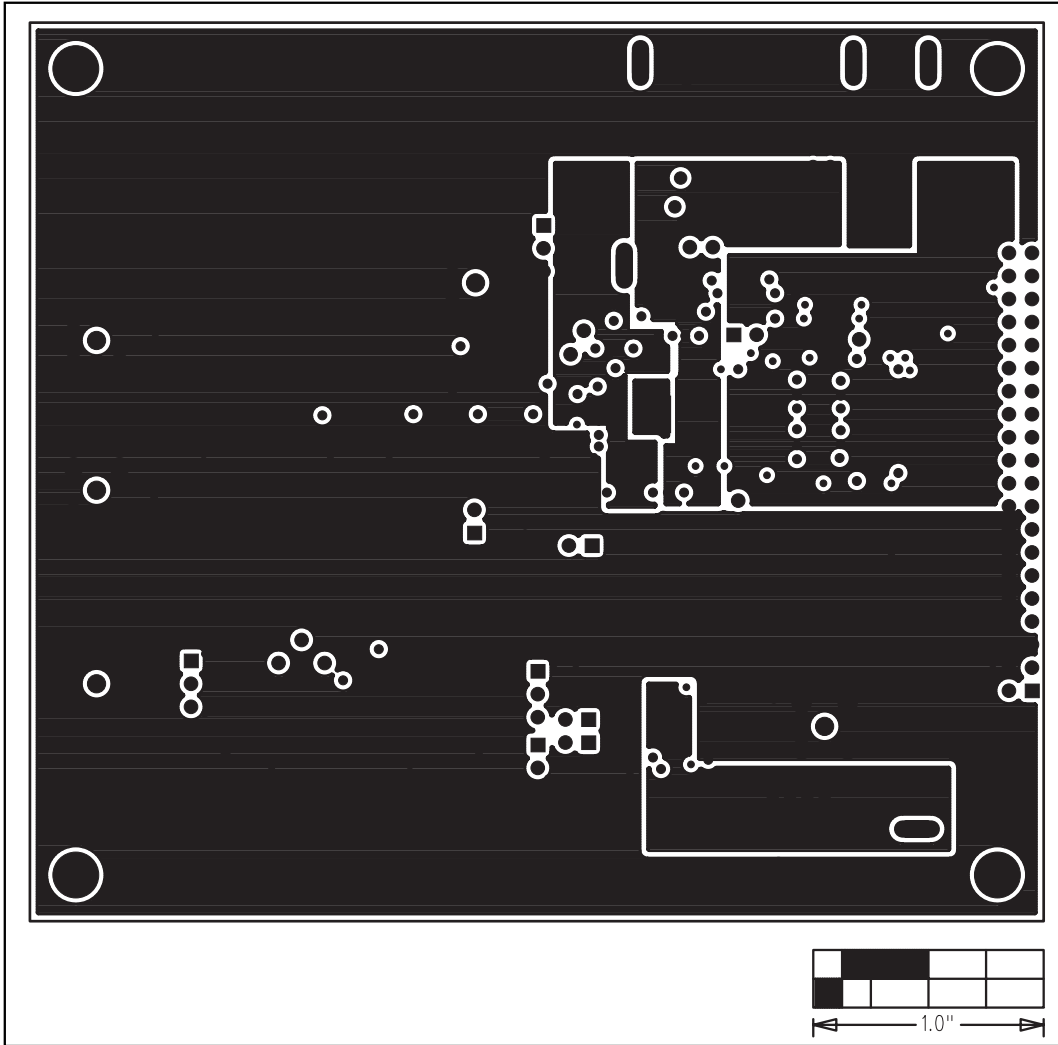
MAX1211 EV Kit PC Board Layout (Inner Layer 3)—Power Planes
